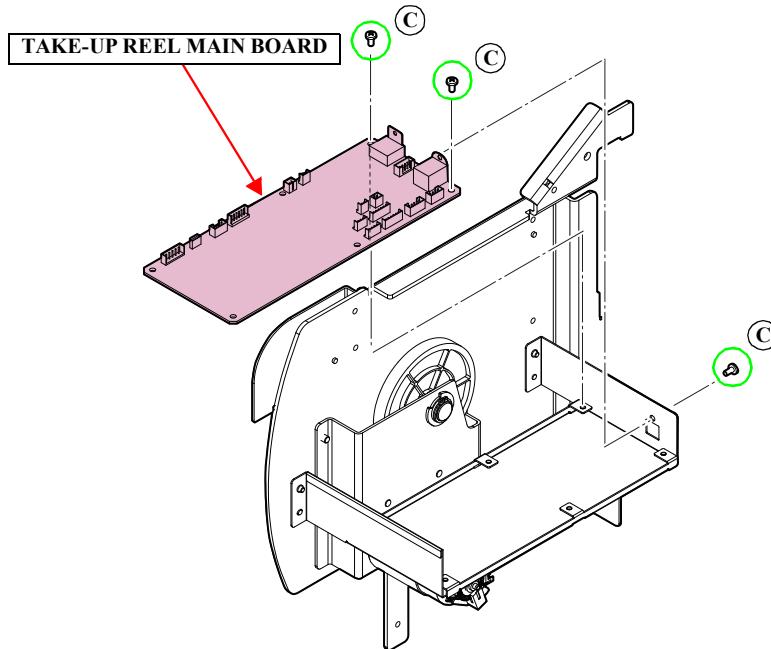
Removing the TAKE-UP REEL MAIN BOARD
